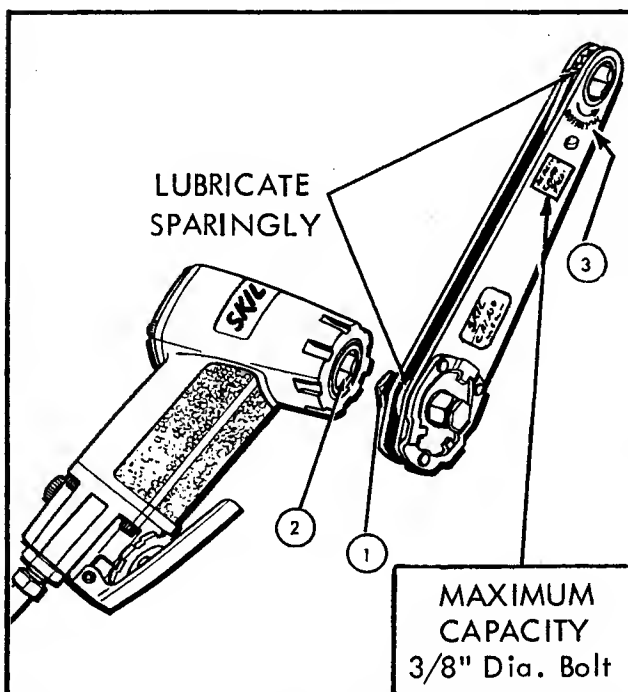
ATTACHING FLAT ATTACHMENT TO MODEL 1120 AIR IMP WRENCH
